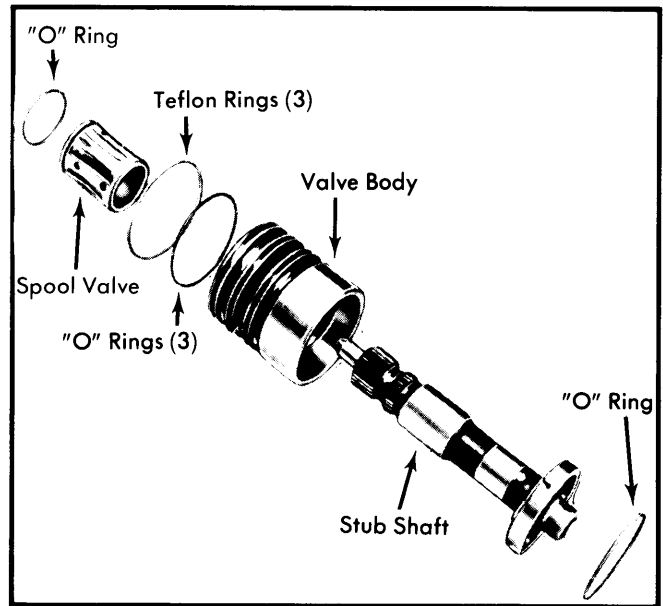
Disassembled View of Valve Body and Input (Stub) Shaft Assembly
